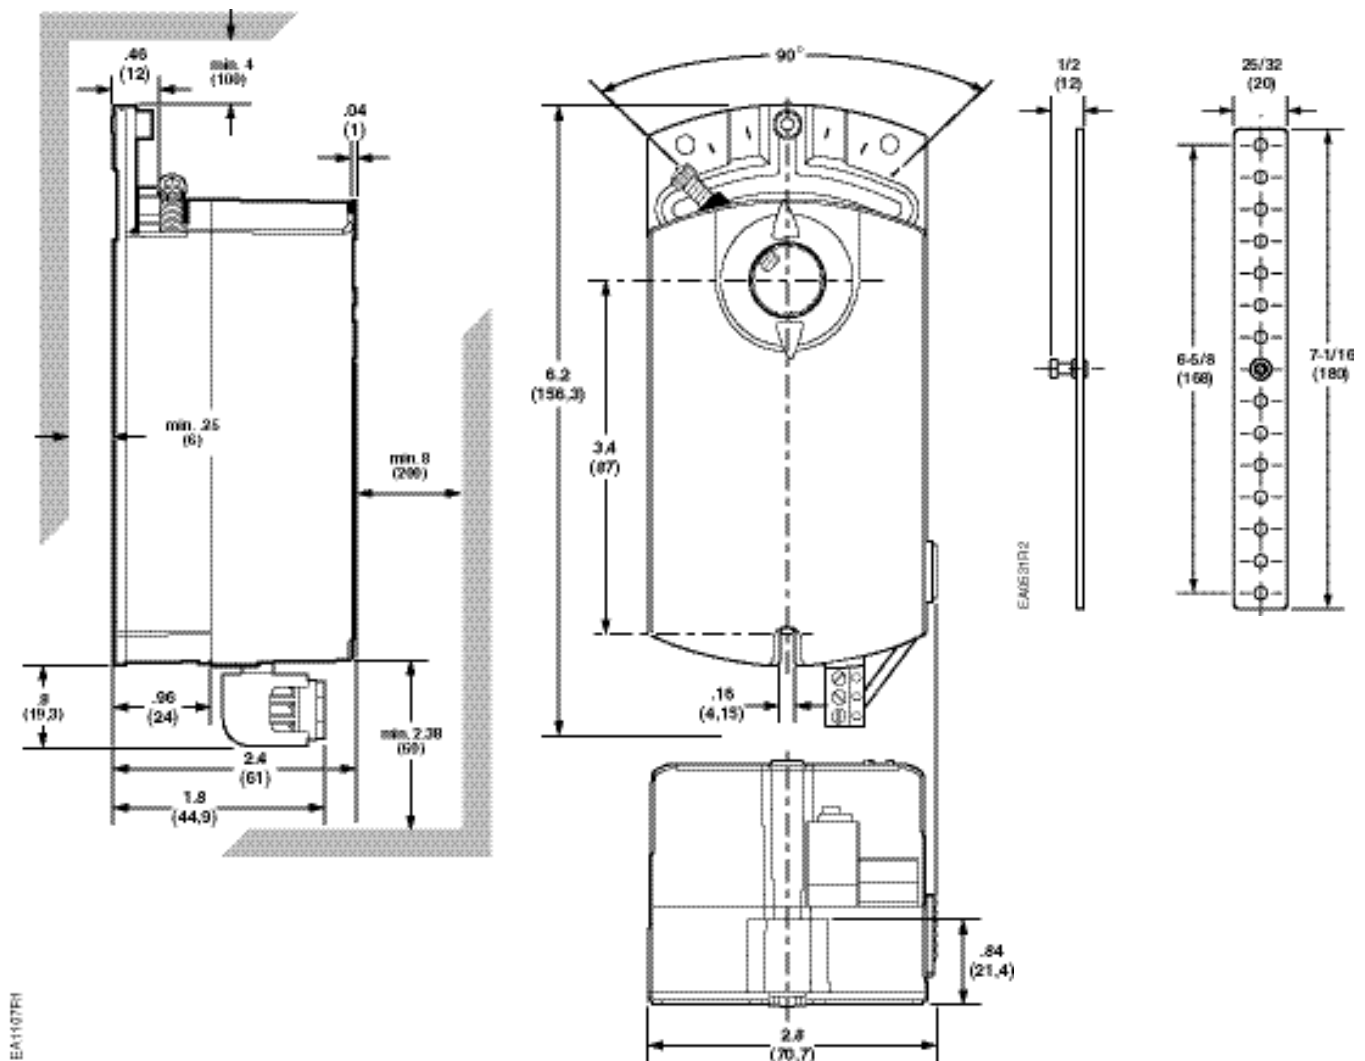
Dimensions of the OpenAir GDE Actuator with Terminal Strip and Mounting Bracket in Inches (mm).
